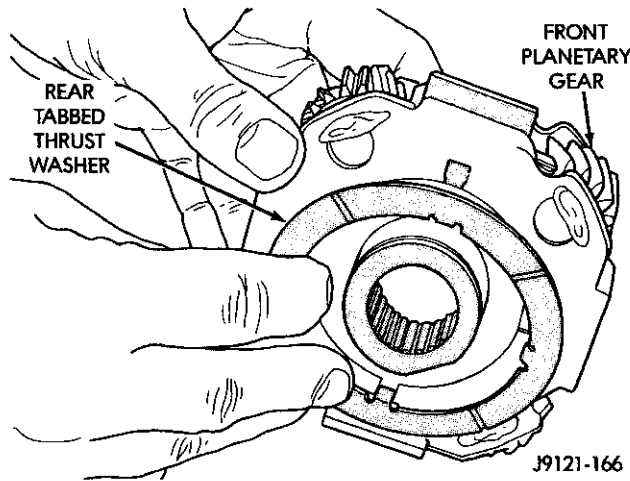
Installing Rear Thrust Washer On Front Planetary Gear
